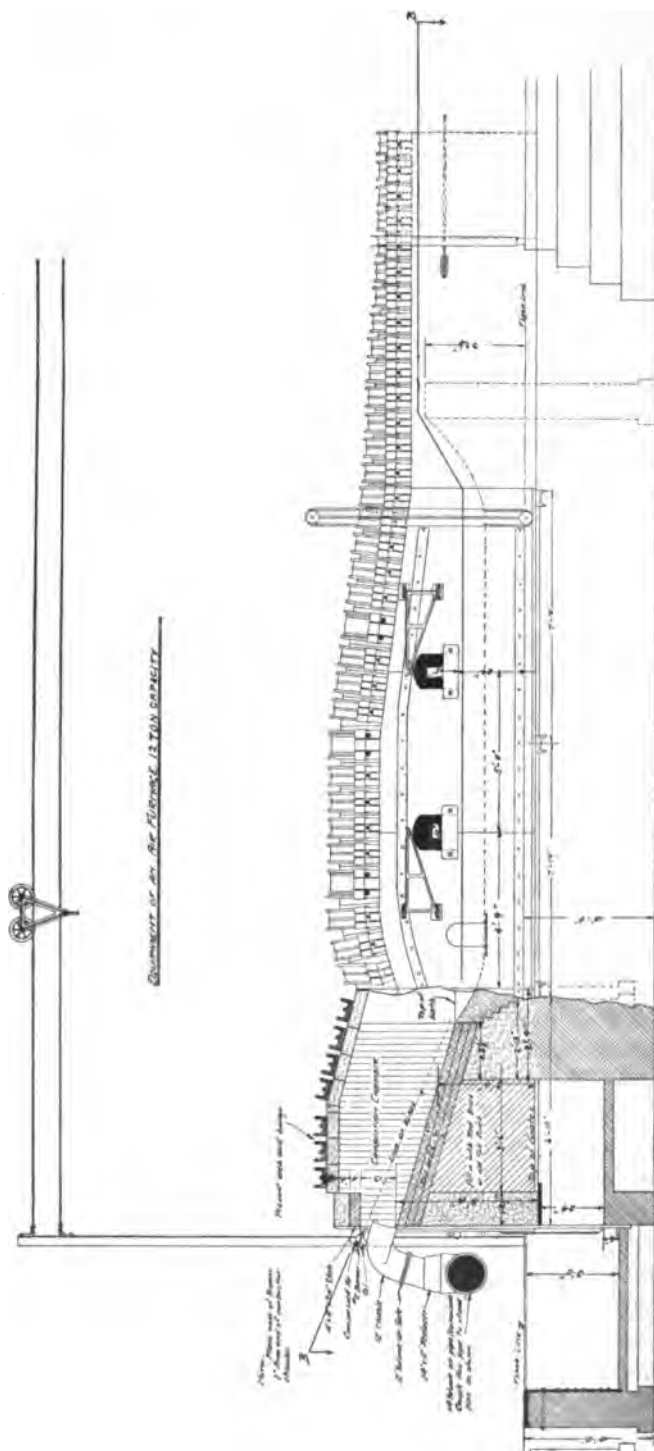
TWELVE-TON AIR FURNACE OPERATED WITH ONE BURNER.
